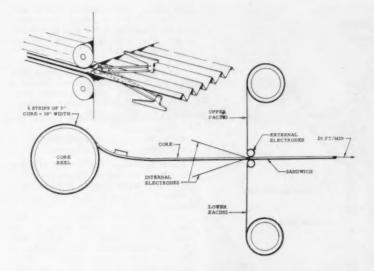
Schematic of welder which produces 385 welds at one time. At a sandwich speed of 20 fpm, 46,200 welds are made each second.
